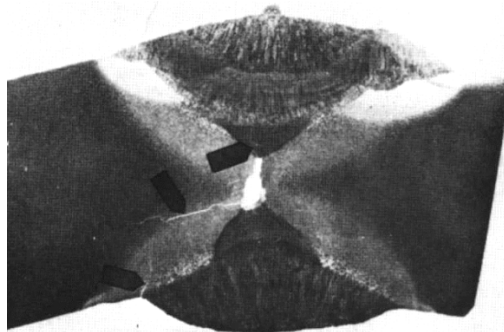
Butt weld of the sonar flange plate. Root and toe cracks, as well as lamellar tearing are indicated by the markers [1.4]
